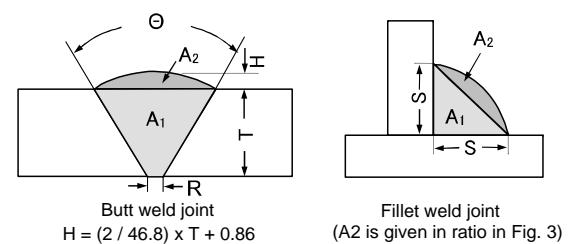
Weld sizes ( $\Theta$  in deg., H, R, S, and T in mm)
